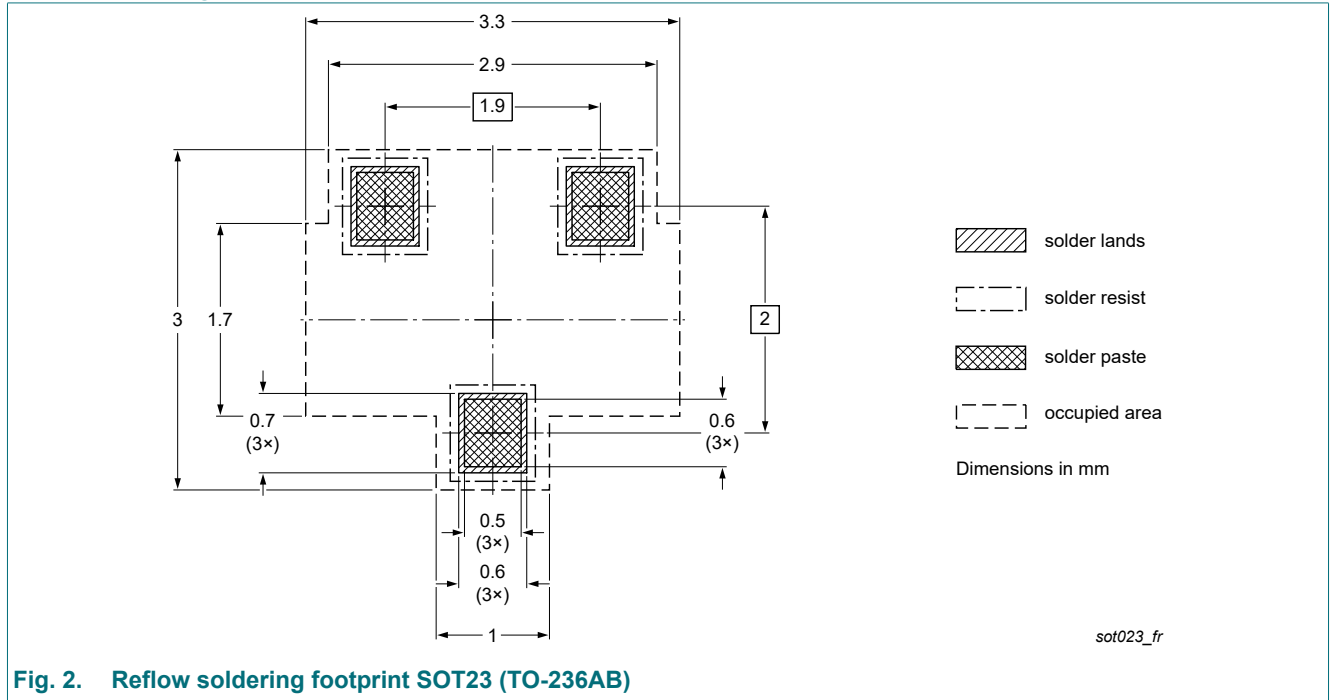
Reflow soldering footprint SOT23 (TO-236AB)
